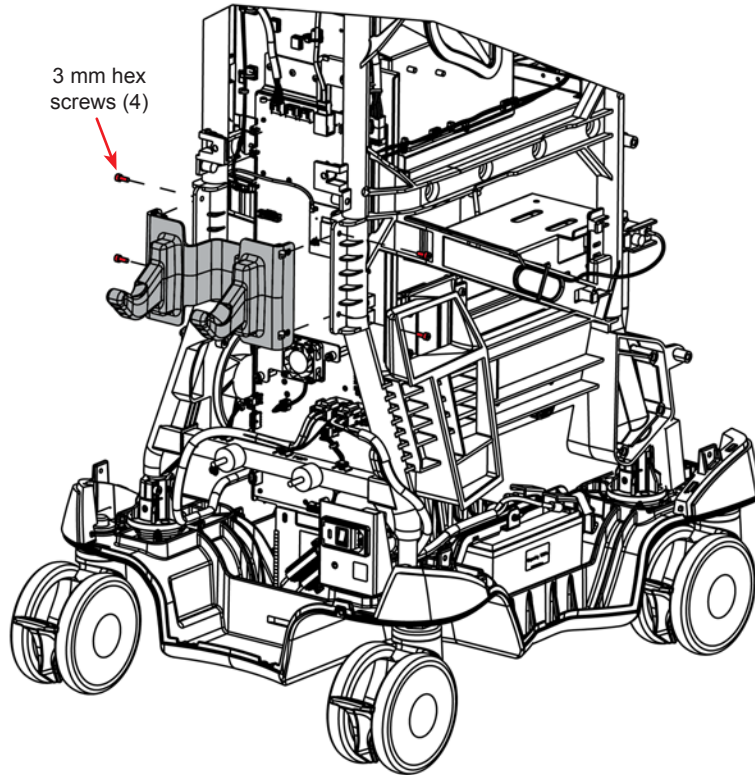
Footswitch Hook Removal (shown with IV Pole removed)
